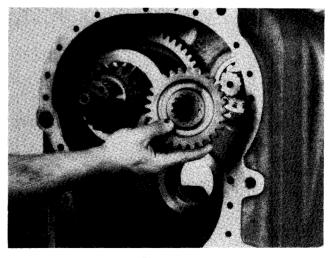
Remove 1st speed clutch drive gear retainer ring.
